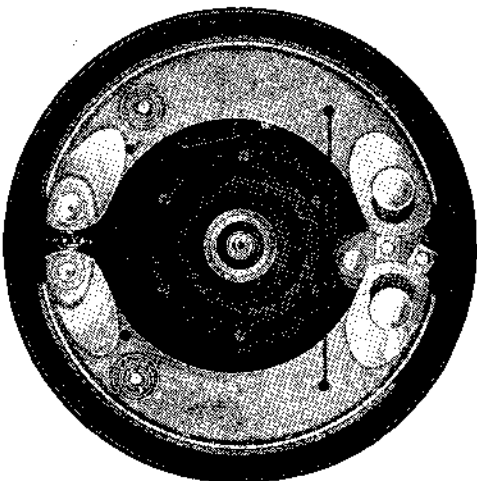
Brake Shoe Assembly (Two Shoe Type)
